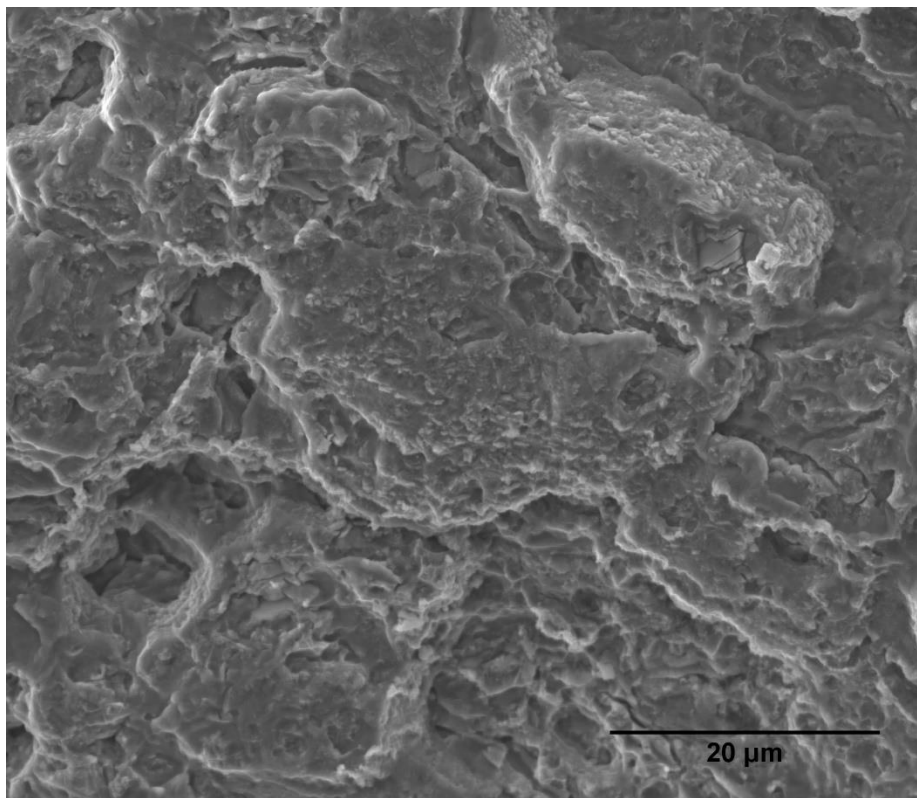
Fracture surface with serrated edges from fracture Al-A
